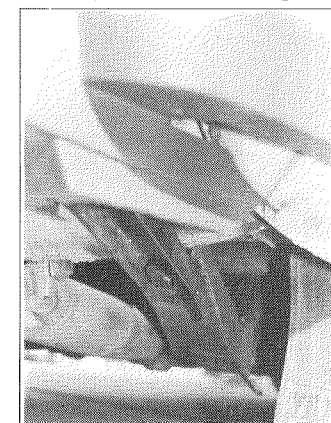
The rear bumper anchored to the rear chassis via sliding joints.
